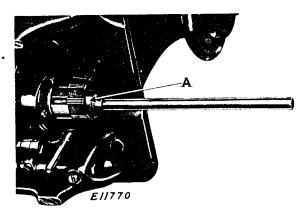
Putting Belt on Lower Pulley with Belt Replacer 244005
